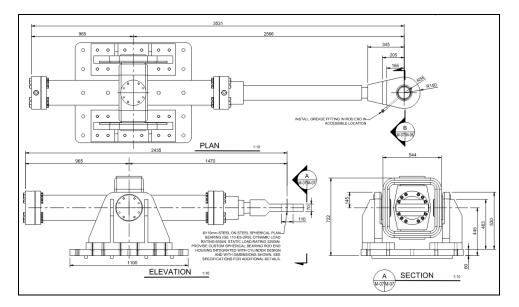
Span Drive Cylinders Plan, Elevation and Section
